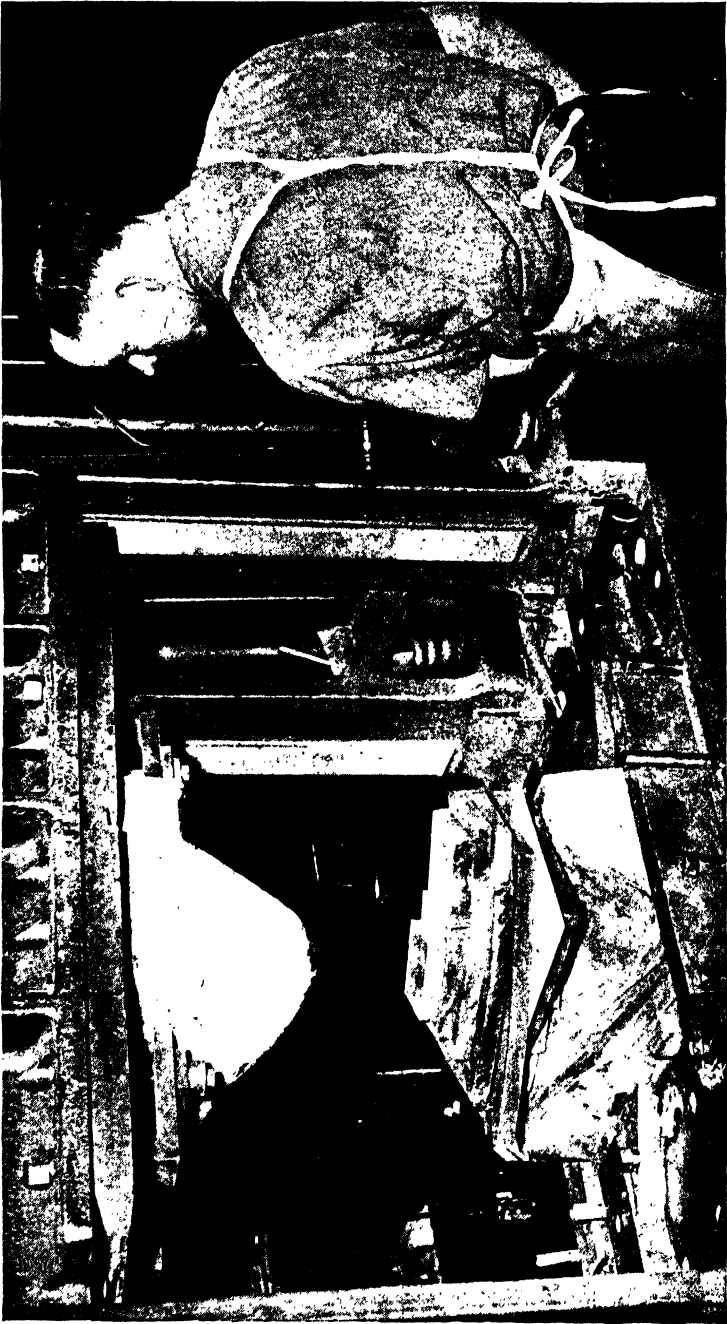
PLATE XVII.—Forming by arranging rubber pads. Illustration of a preliminary forming operation on a Stainless-steel part that involves a warped surface. This piece could not be successfully drawn in a crank press. As in Plate XVI, the rubber pads are removed before the final strike is made. This punch and die are set up in a hydraulic press. (Courtesy of Curtiss-Wright Corporation.)
